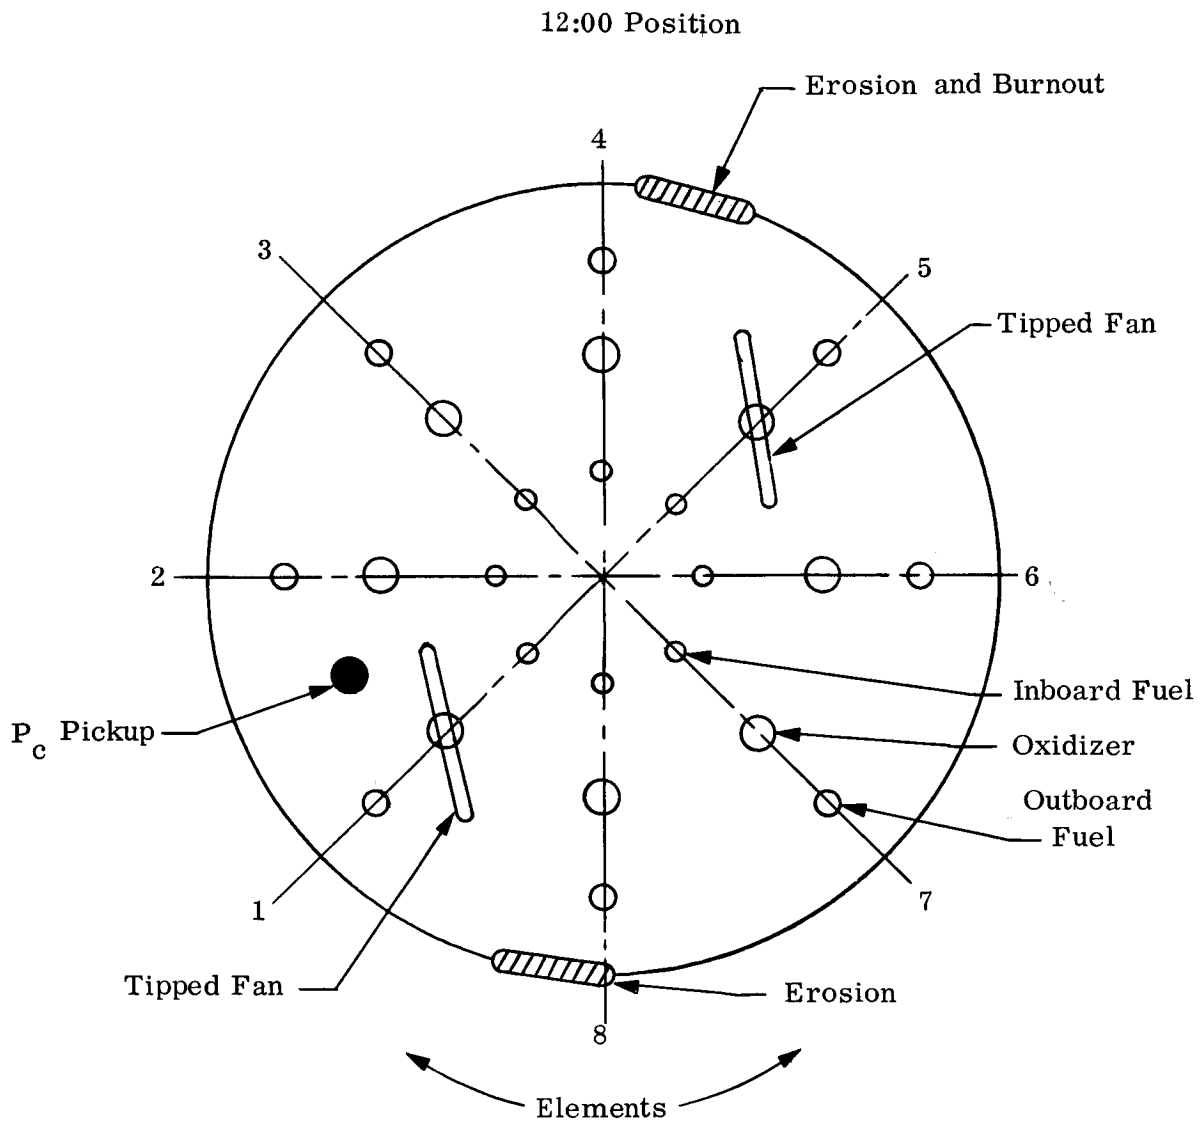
Injector S/N 2-C Water Flow Impingement After Fire Test of Engine Assembly S/N 2
